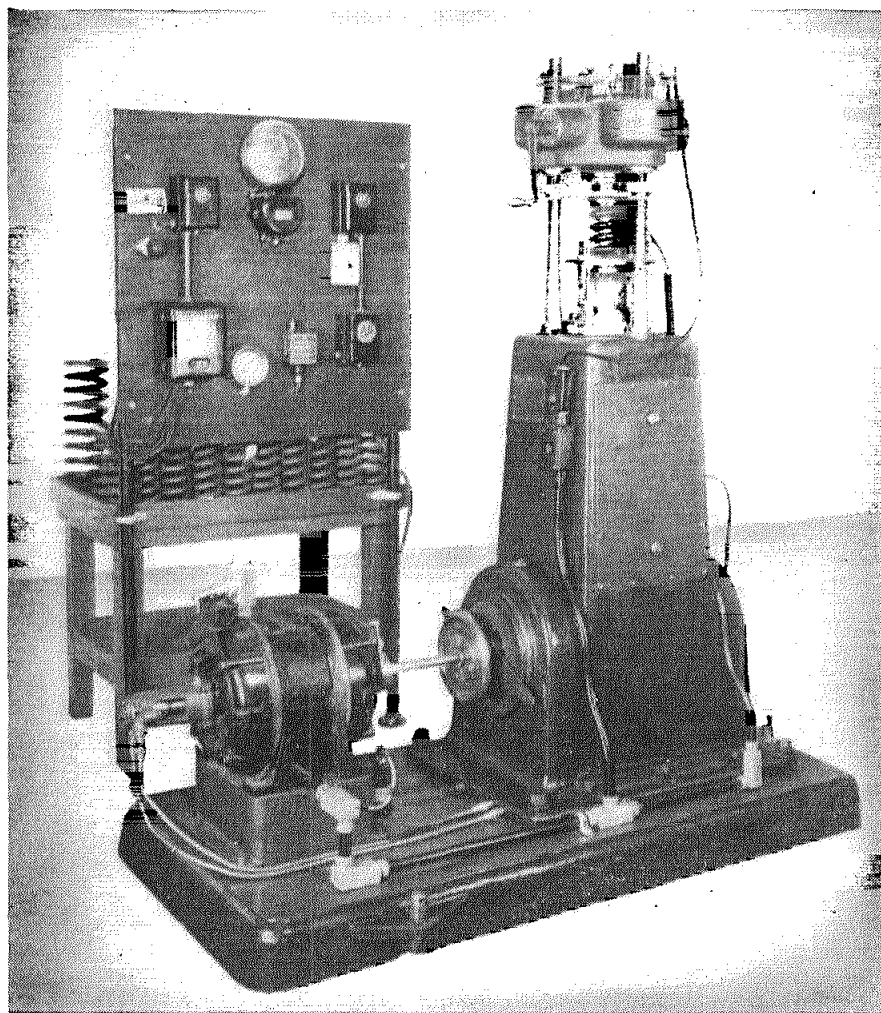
Resonance type spring testing machine having a set speed of 1,200 cycles per second. As here shown, the coil spring mounted in the head of the machine is under test to determine fatigue life. A special fixture for loading bars in torsion can be installed in machine head.
